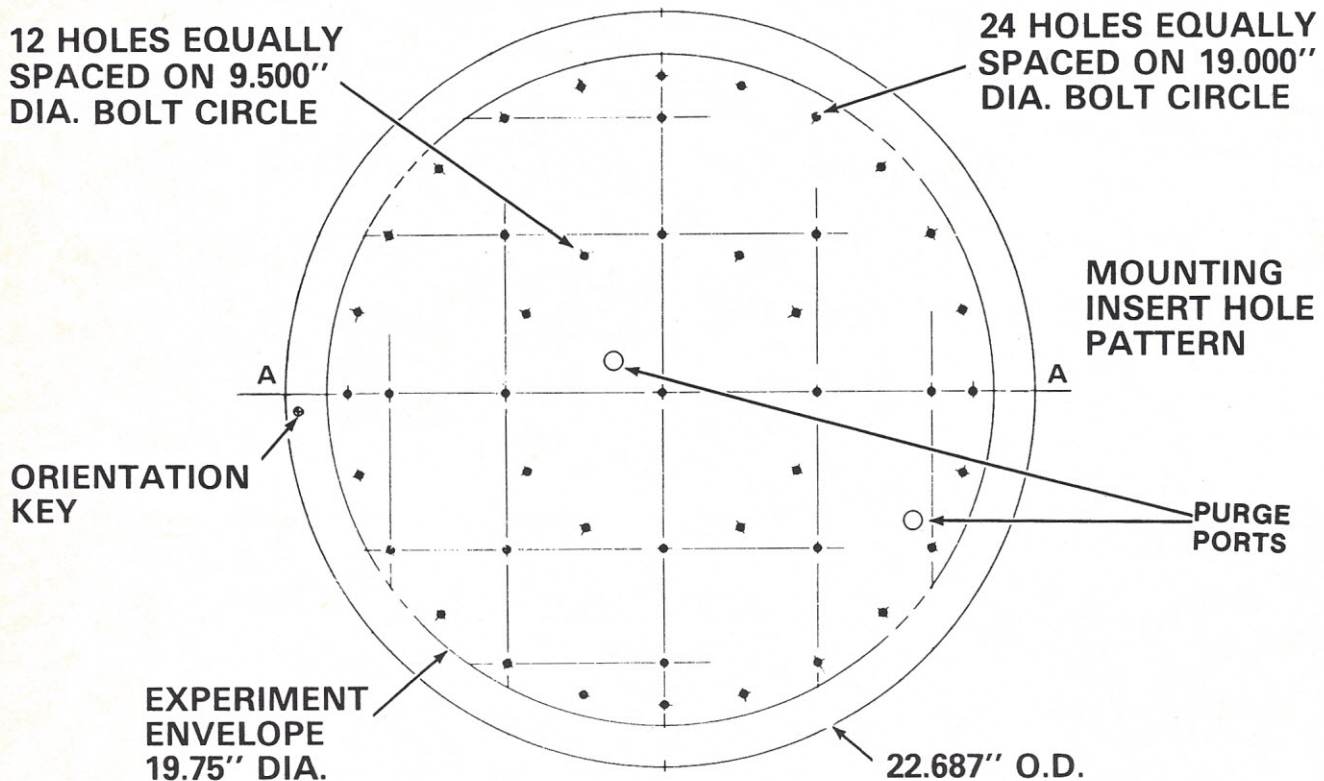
A detailed look at the dimensions of the experiment mounting plate (EMP).
